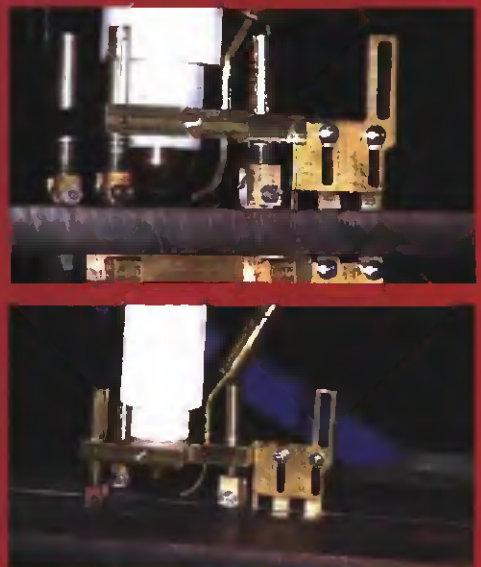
Photographs of the TMFP welding apparatus: A — view from bottom; B — view from top.
